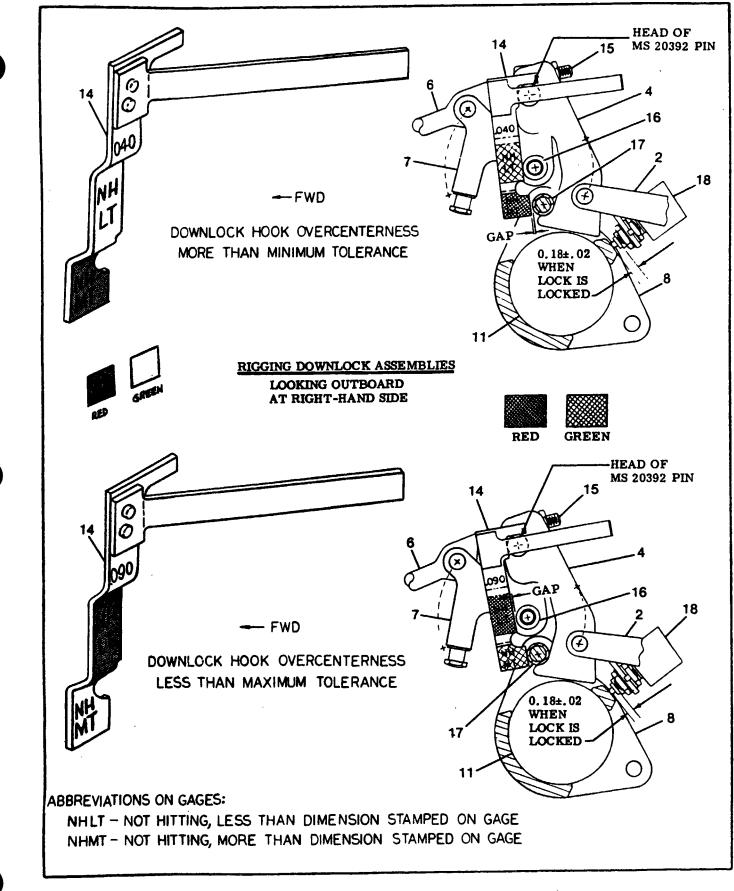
Rigging Main Landing Gear (Sheet 2 of 4)
